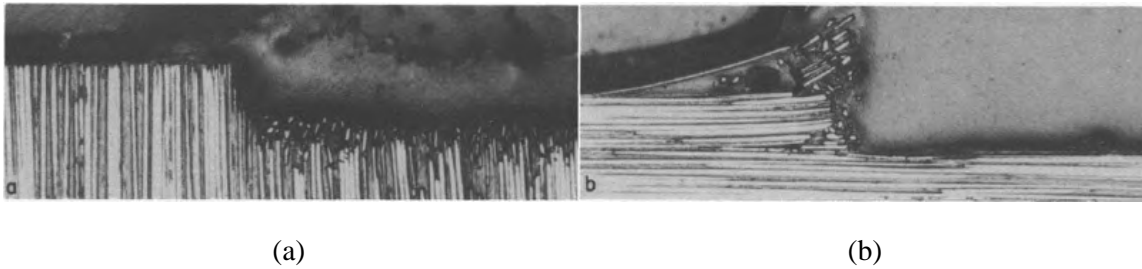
Cross section of specimens in CFRP cutting; (a) fiber angle 90° , (b) 0° [35]
